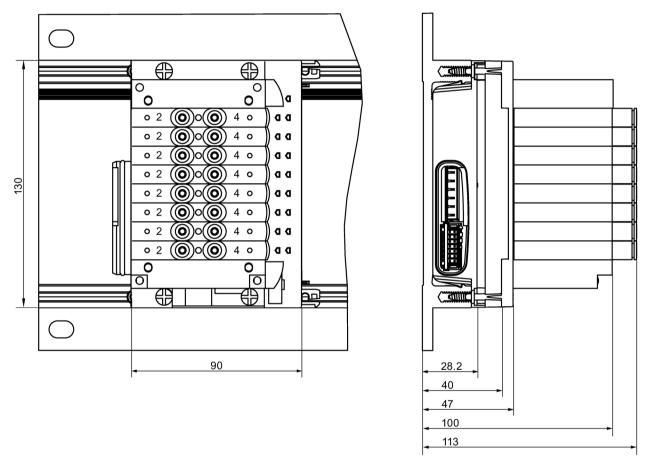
Dimension drawing of 16 DO DC 24V CPV10 pneumatic interface module with FESTO valve terminal CPV10 on compact type rack
